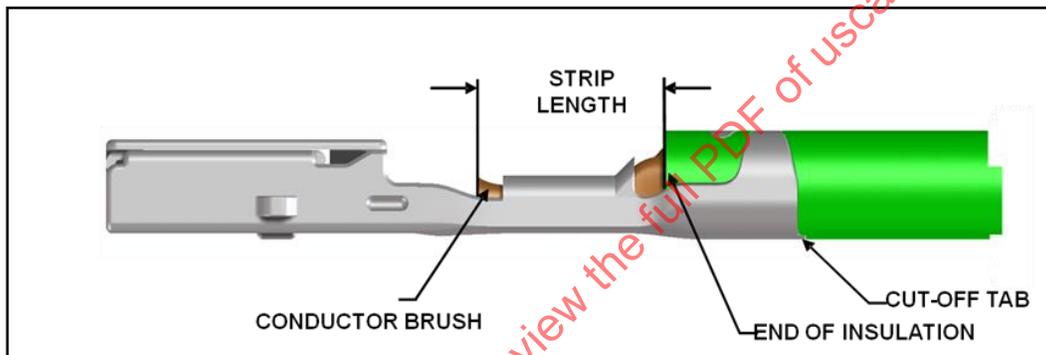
A - PARTS OF A CRIMP (SIDE VIEW)
